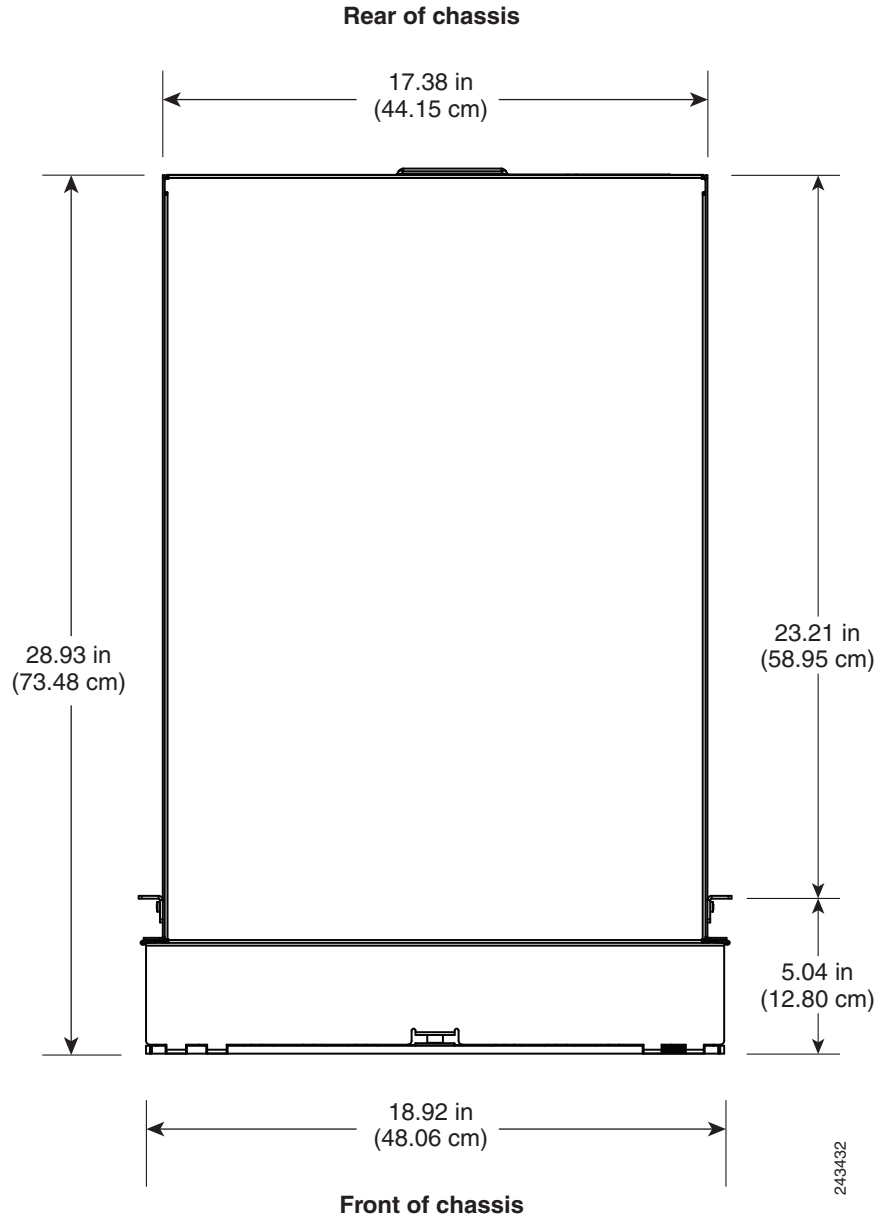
Cisco ASR 9010 Router Chassis Footprint Dimensions—Top Down View
